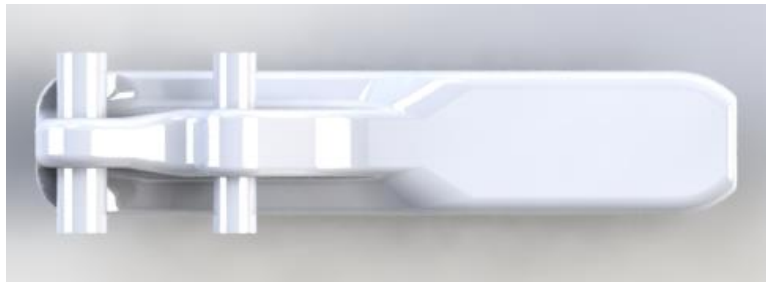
Top view of foot version 3.11. The extrusions at the ankle and Achilles holes are shown. They are used to help create the 3D molds.
